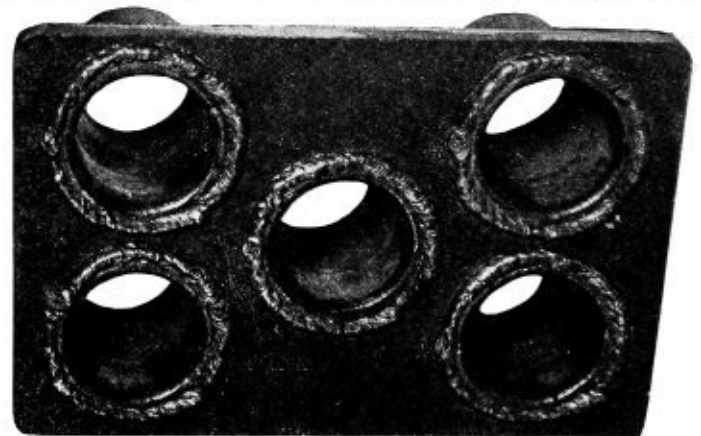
Boiler Tubes Electrically Welded into Tube Sheet, Using Metallic Electrode
